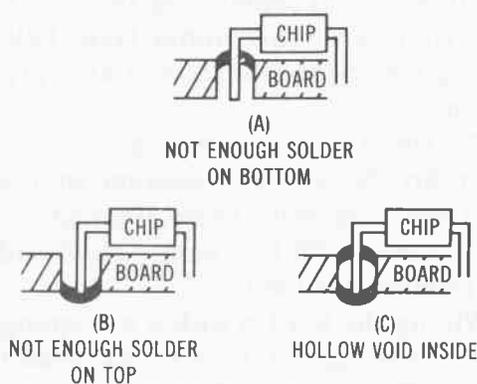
Examples of inadequate soldering on a printed circuit board.
